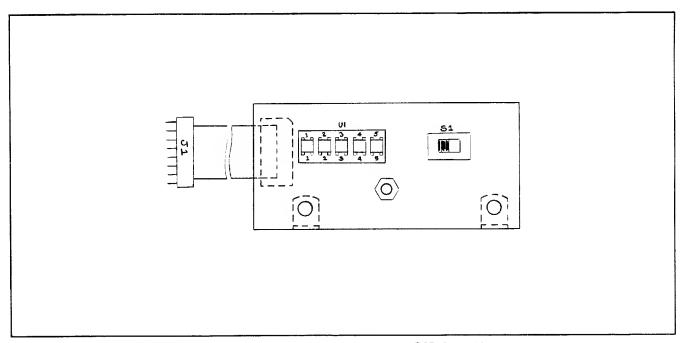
A18 IEEE-488-1975 Switch PCB Assembly
